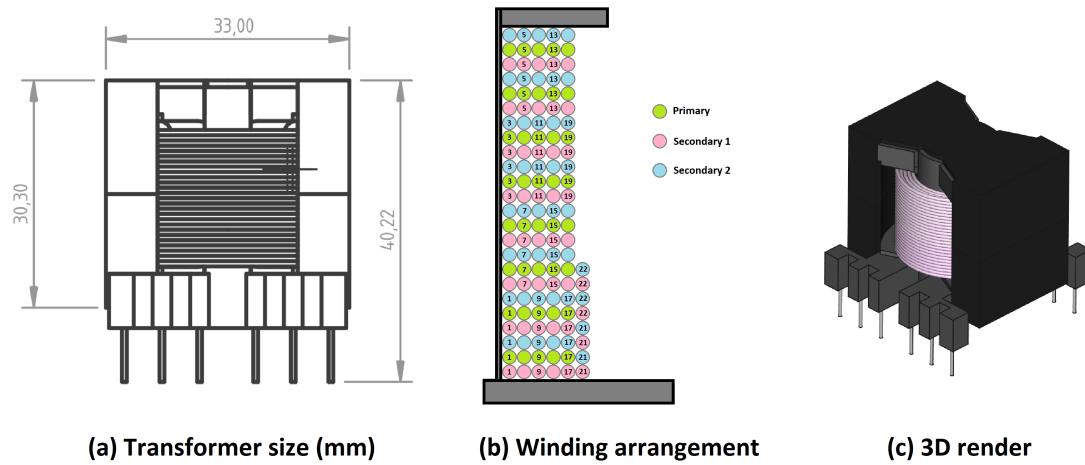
Transformer: (a) Coil Former (b) Winding arrangement (c) 3D render
